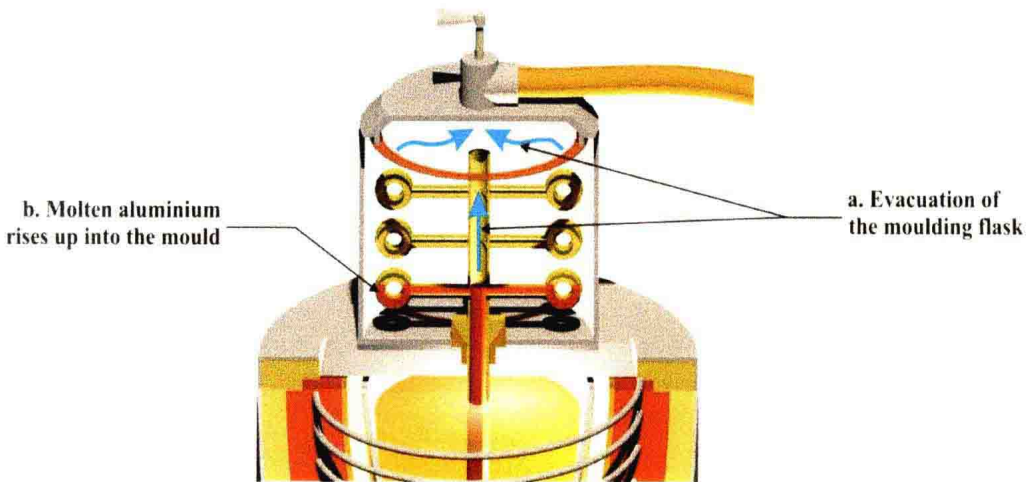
The evacuation of the moulding flask (a) also evacuates the investment mould cavity. This causes molten aluminium to rise up into the mould cavity (b)
